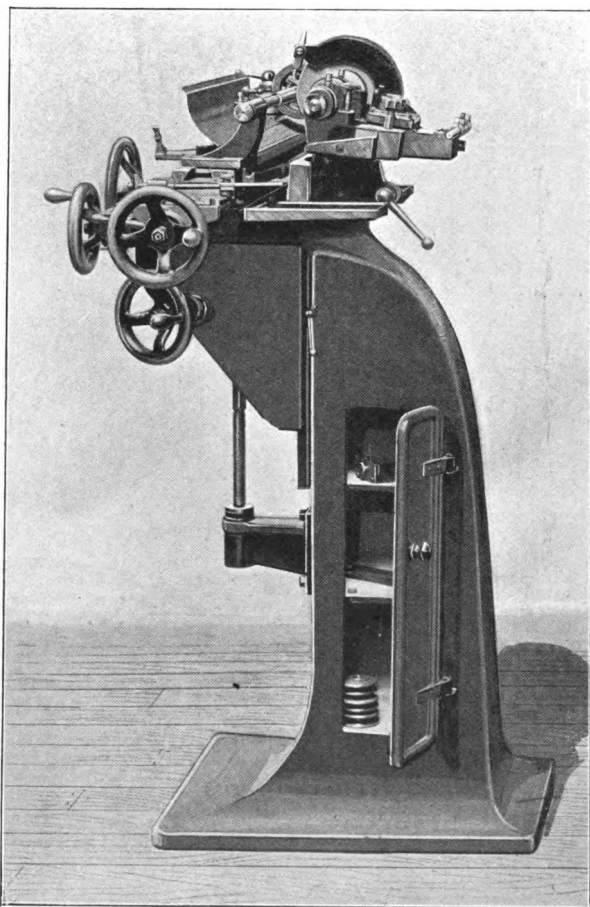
"Guest" Emery Grinder. Position for Grinding Shafts and Tapers.
